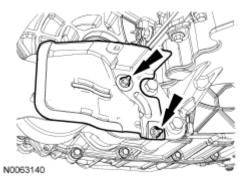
Locating Roll Restrictor-To-Subframe Bolt Courtesy of FORD MOTOR CO.
